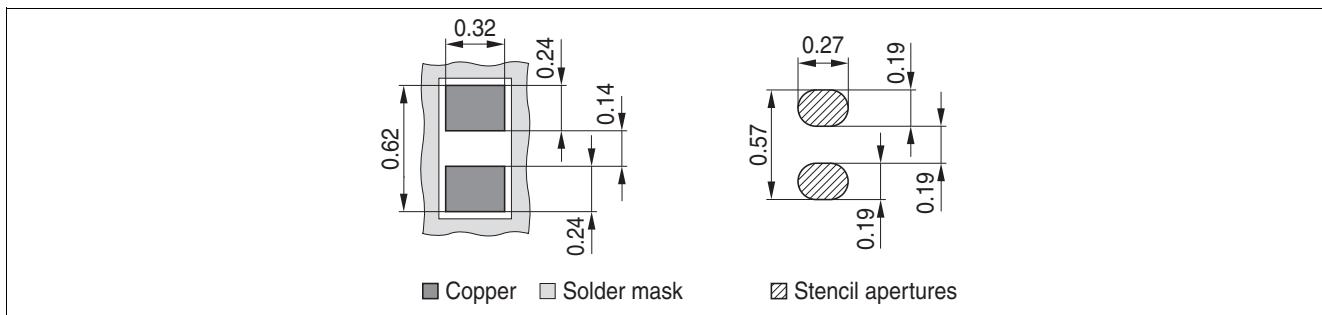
WLL-2-1 Footprint (dimension in mm) Recommendation for Printed Circuit Board Assembly [2]
